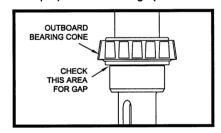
Checking for Zero Clearance with Feeler Gauge
